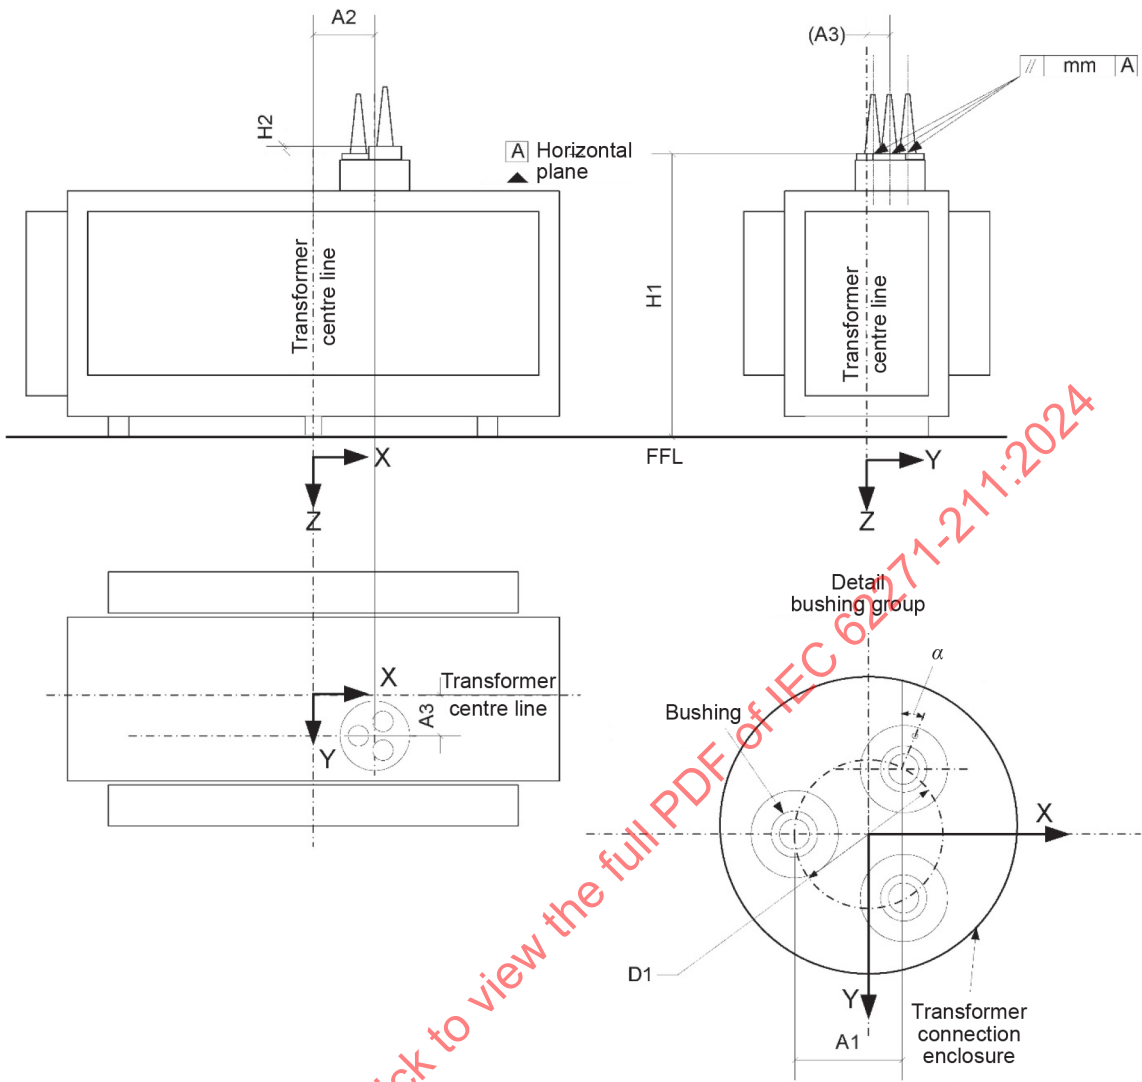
Standard dimensions for typical direct connection between power transformer and gas-insulated metal-enclosed switchgear
